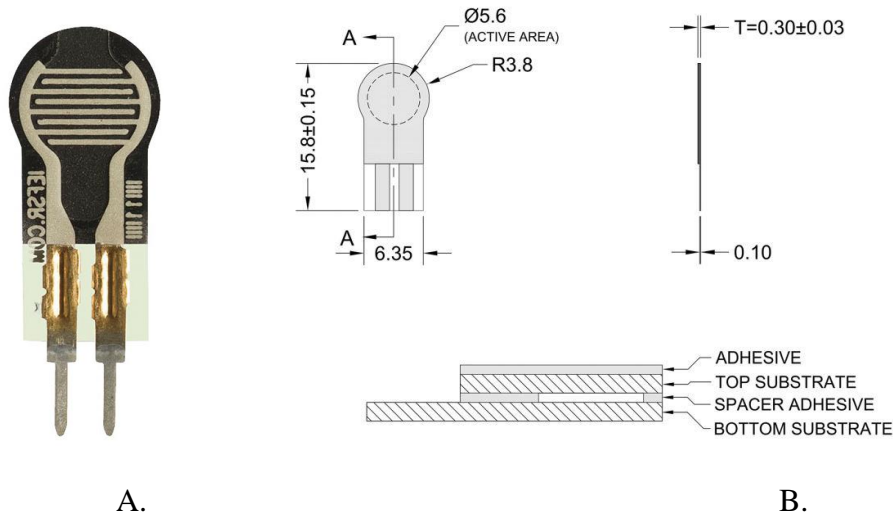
A. Interlink Electronics FSR 400 Short – B. CAD drawing [29]
